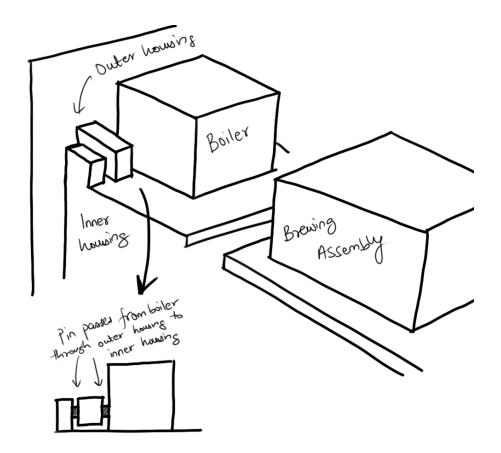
Sideways pin could create a 2-point contact with inner housing with the boiler unit placed behind the brewing assembly
